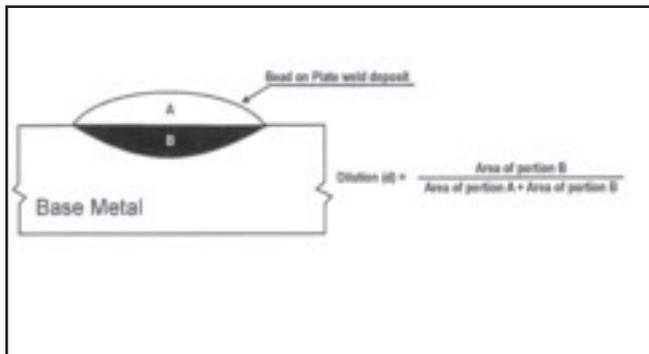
Schematic of weld deposit showing measurement of dilution.
